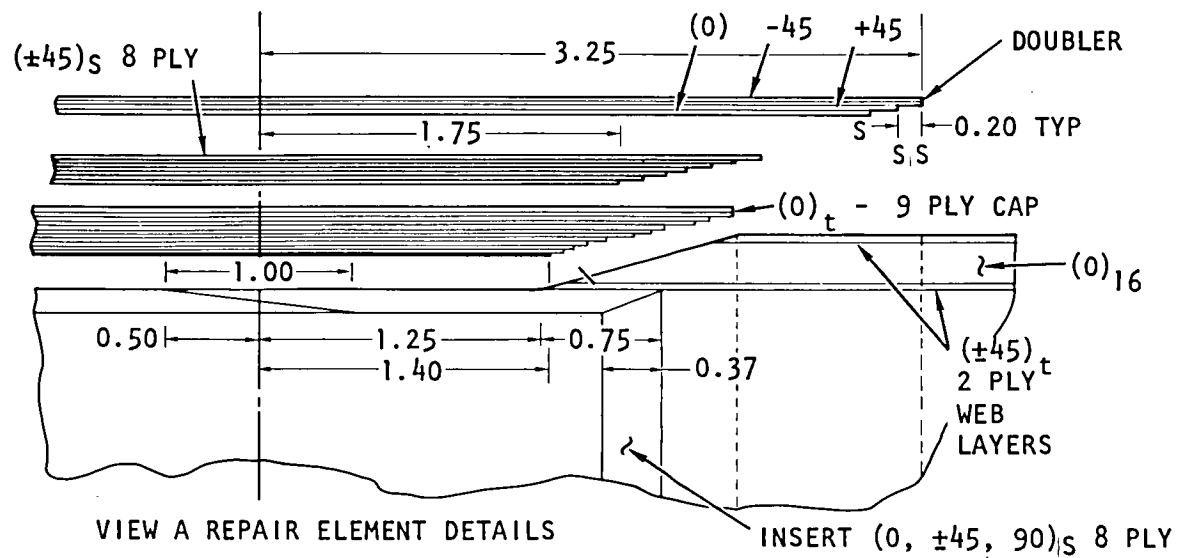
Heavily Loaded Stringer Repair - Internal Support and Patch Design
